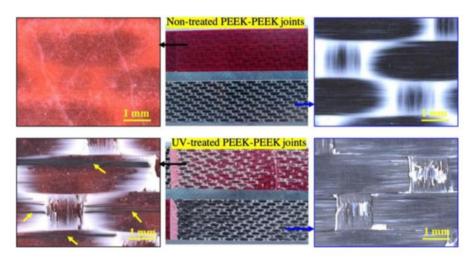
Typical mode-I fracture surfaces of the PEEK-PEEK composite adhesive joints with
